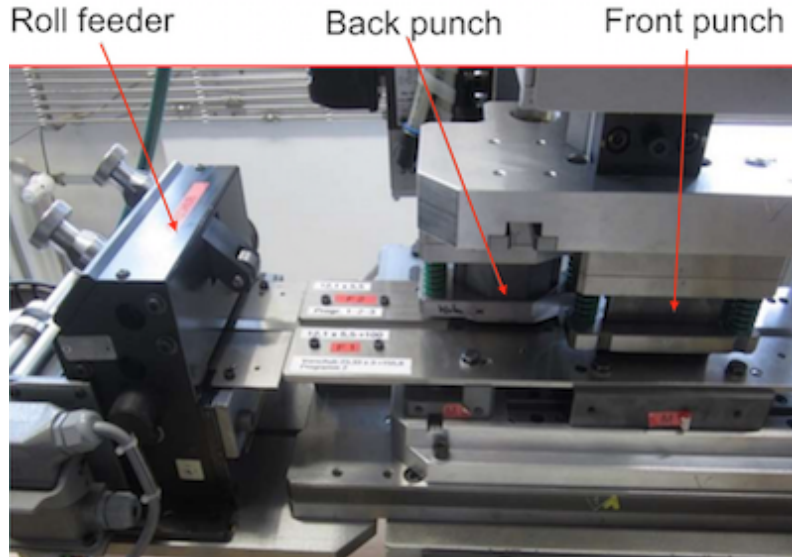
Pneumatic adjustable punching tool. Adapted from Goldacker et al. (2016).
